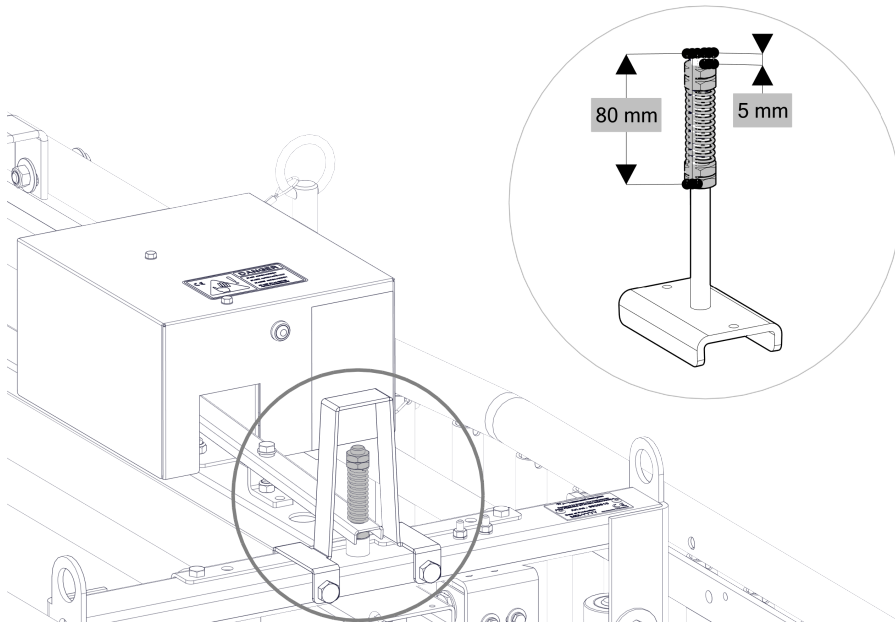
Check the latch plate nuts (80 mm (3.15 in.) / 5 mm (0.20 in.))
